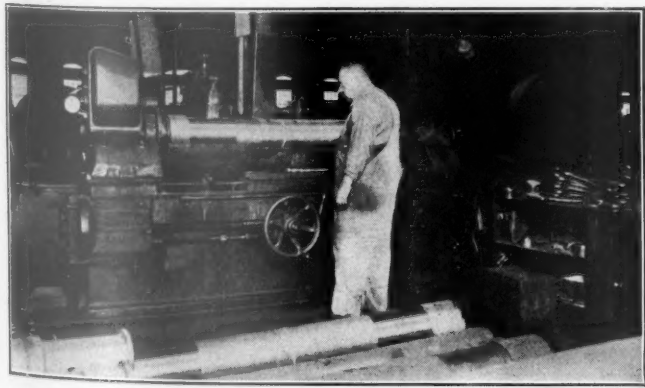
Driving Axle Journals Being Finished on a Landis No. 27 Grinder
